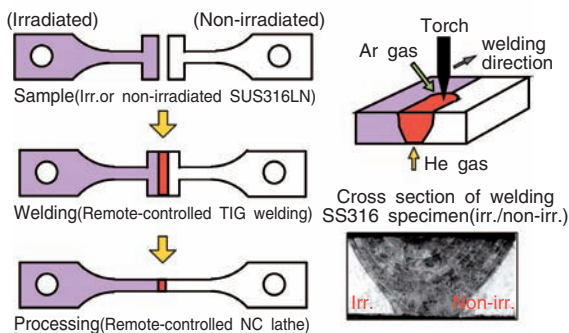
Welding/processing procedures for fabrication of test specimens
